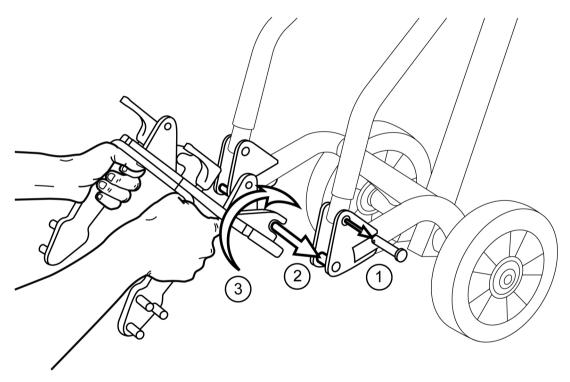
Attaching the edge grinder adapter, steps 1 - 3
